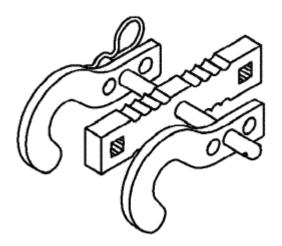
Valve Spring Compressor 8215-A Courtesy of CHRYSLER LLC
